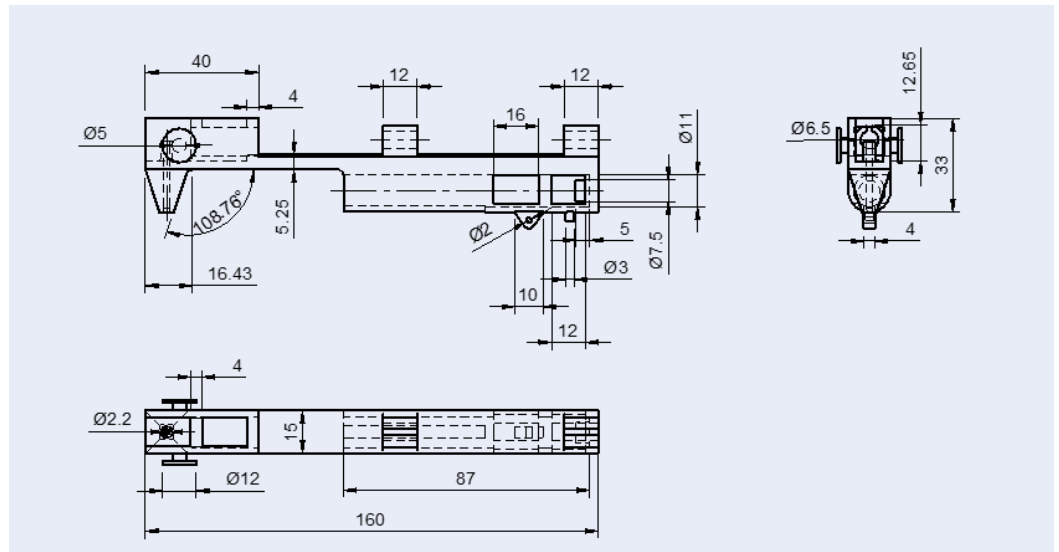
Front, Top, and Side views 2D design with detailed dimensions of the main body. The boundary dimensions are about 160mm x 20mm x 40mm.
